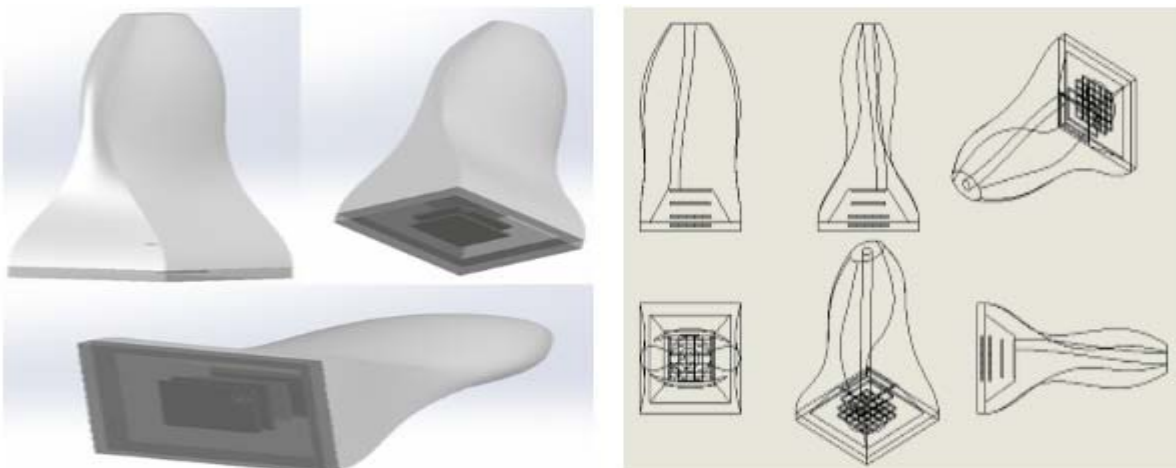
Geometric view of tactile probe/Metal array shape inside of a tissue-like silicon.
